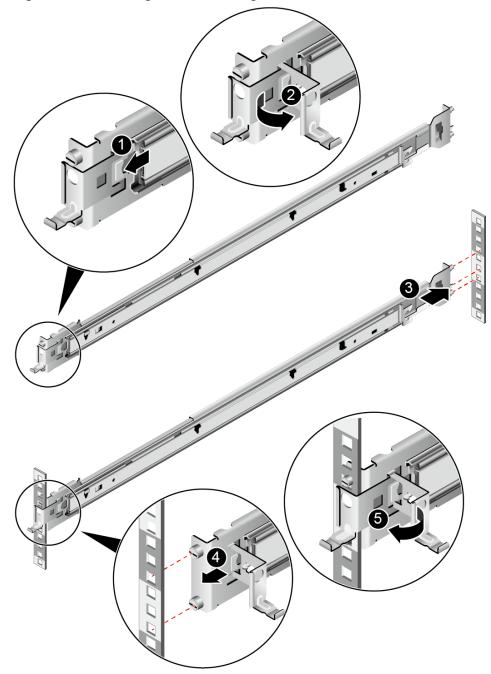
Installing the ball bearing rail kit (BOM code: 21241258-002)
